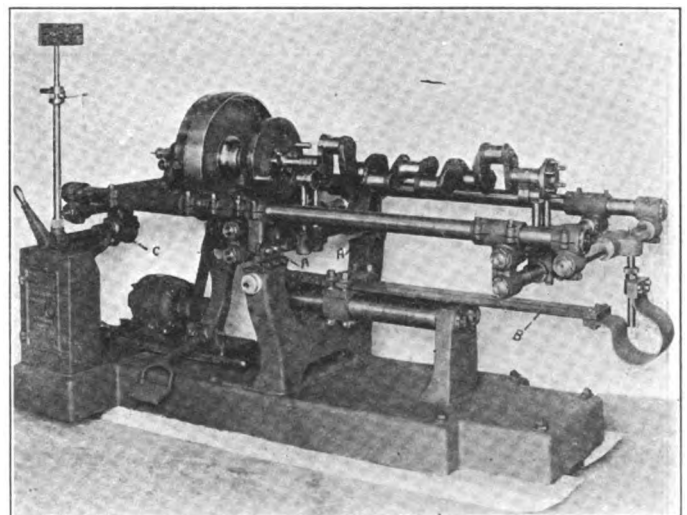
A RECENTLY DEVELOPED MACHINE FOR DETERMINING THE BALANCE OF A ROTATING BODY
